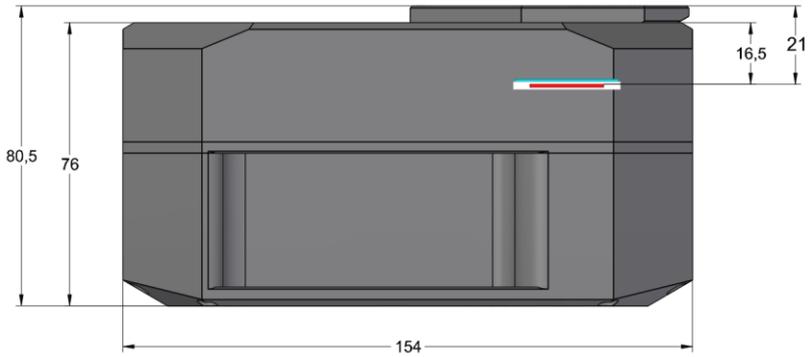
C3 camera head with Enhanced Cooling side view dimensions
